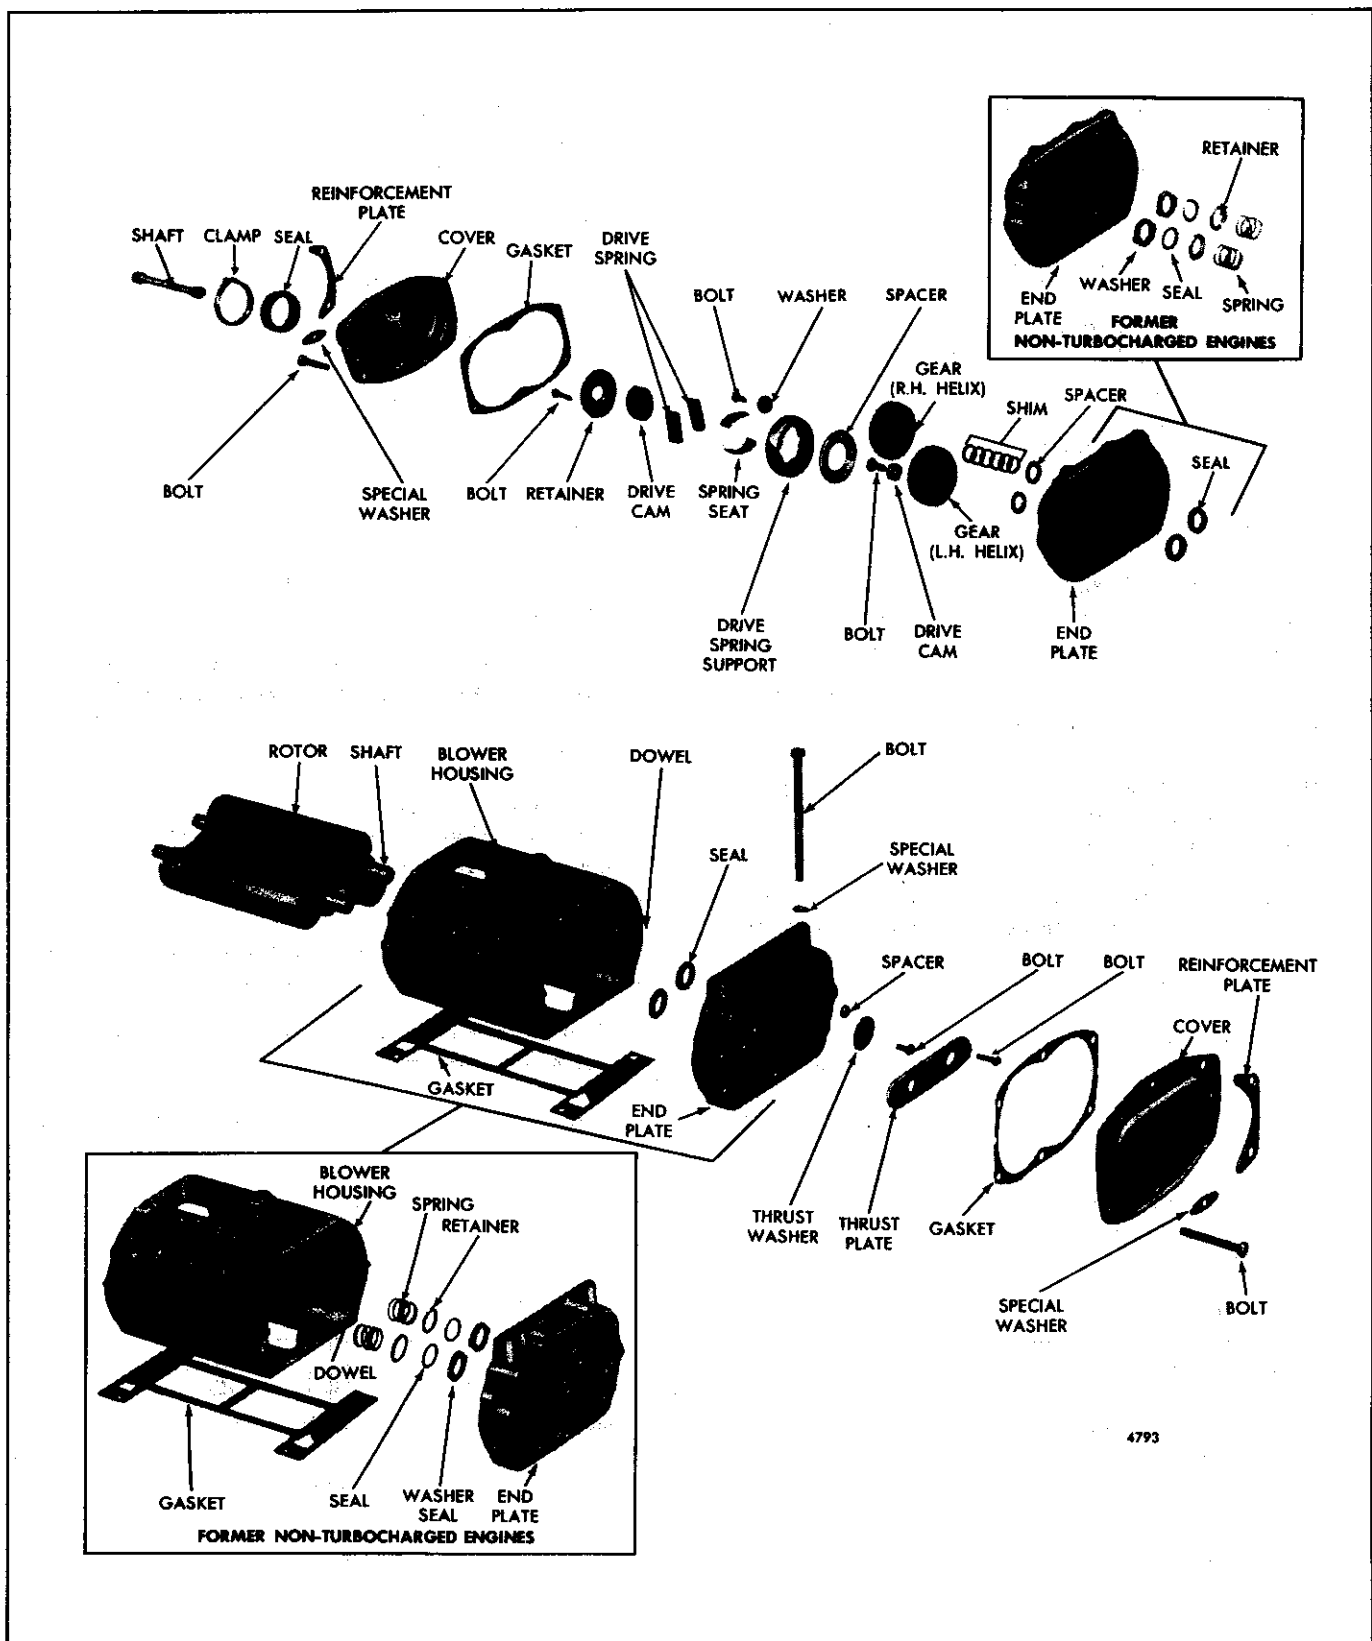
Typical Blower Details and Relative Location of Parts (3-53 Engine Blower)
